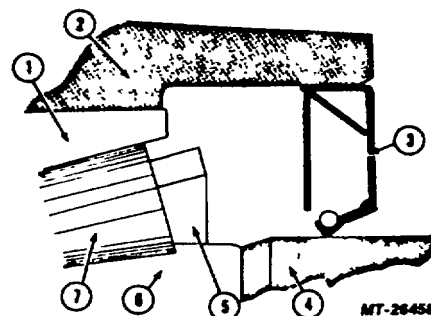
Wheel Seals Used with Grease Lubricated Wheel Bearings
